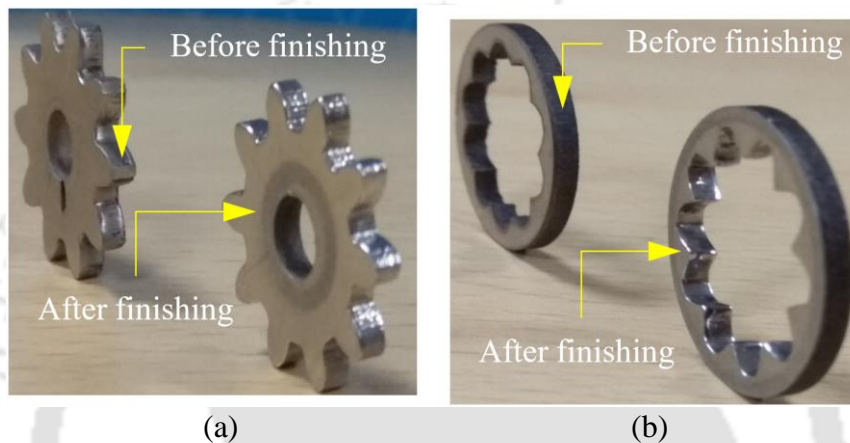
(a) Miniature steel gear and (b) uniform flow restrictor before and after finishing
